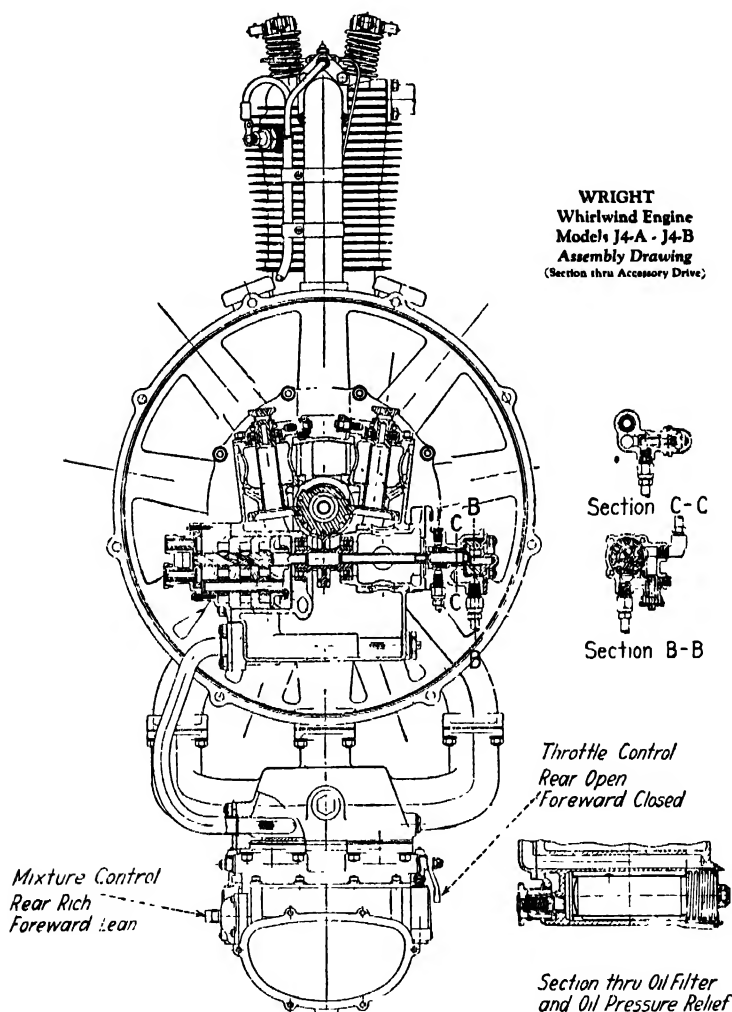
Assembly Drawing Showing Section Through Accessory Drive of Wright Models J 4 A and J 4 B Engines.
